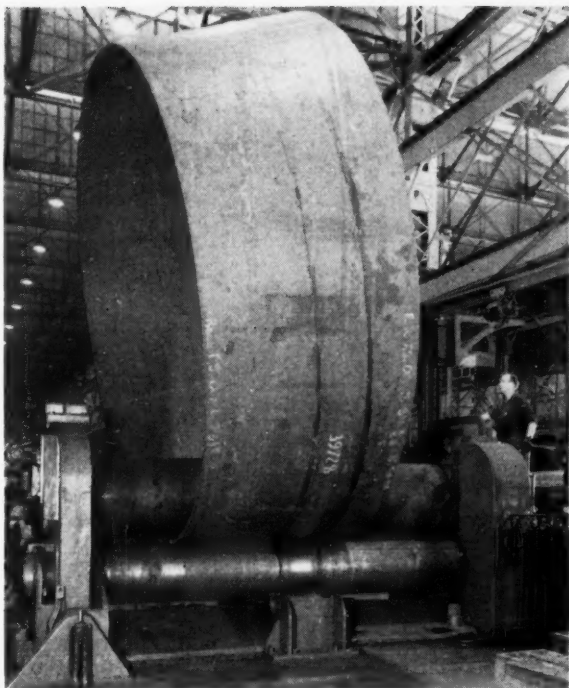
Large column course is shown being formed in a heavy-duty plate roller.
